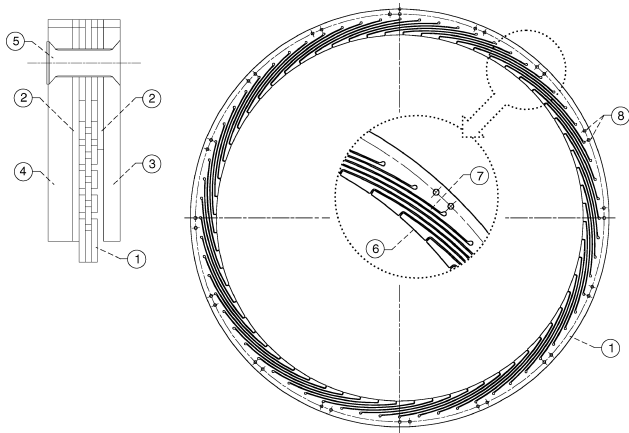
Finger seal design: 1, finger element; 2, spacer; 3, forward cover plate; 4, aft cover plate; 5, rivet; 6, finger contact pad; 7, finger; and 8, indexing and rivet holes.
